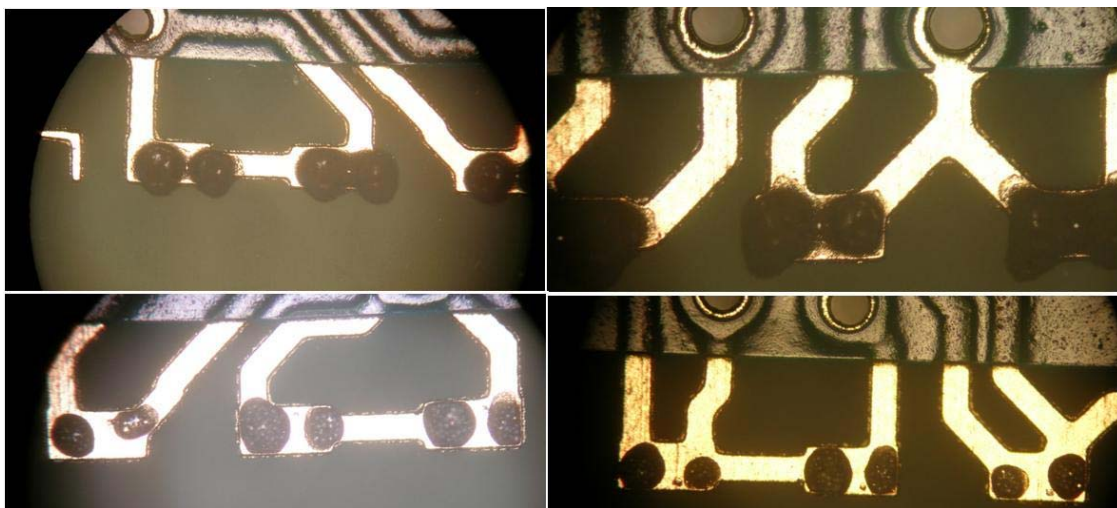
Printing of adhesive for the shear test boards. Upper: ICA-4G. Lower part: ICA-30S.
